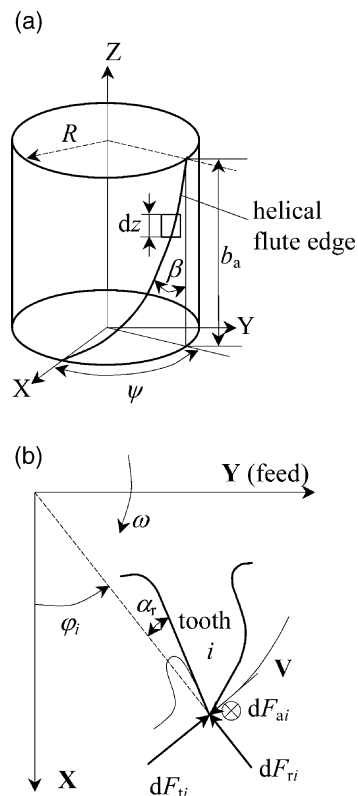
Cutting force model of peripheral milling. (a) Helical flute edge geometry. (b) Differential tangential and radial forces.
